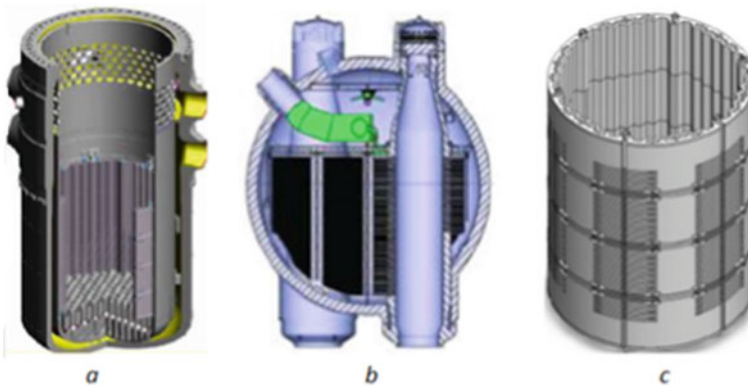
The studied elements of the equipment of the first circuit of the WWER-1000 reactor unit: nuclear reactor vessel a; coolant collector-steam generator vessel welding unit b; reactor core containment c
